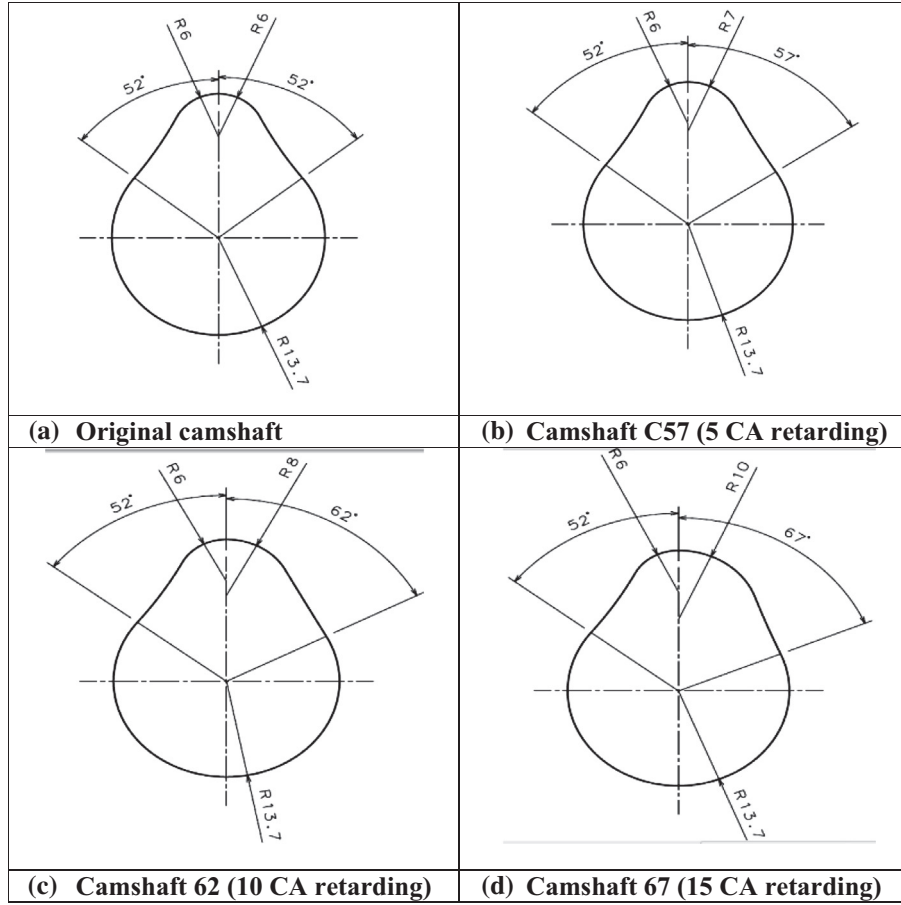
The technical drawings of the original and modified camshafts in accordance with the Miller cycle.
